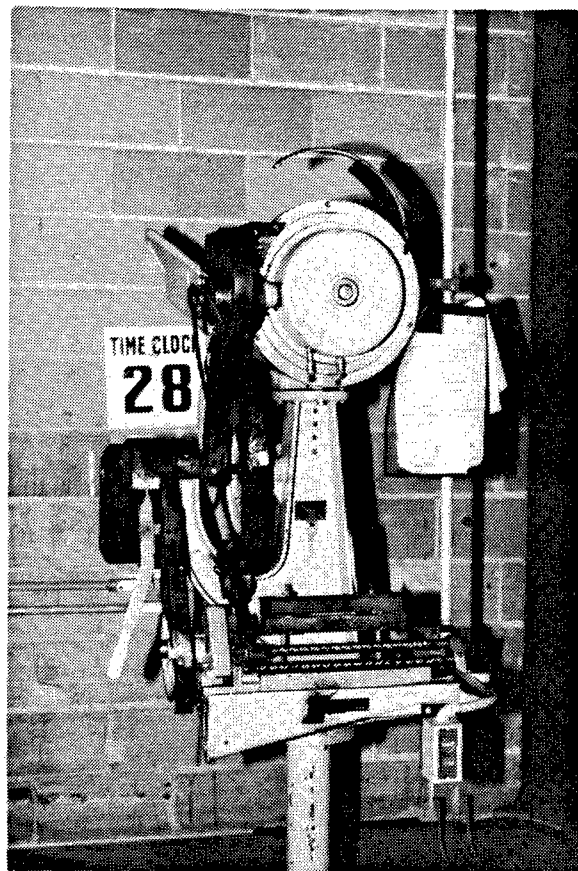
Building 102: Visual Inspection Machine manufactured in 1942 by Fidelity Machine Company.
